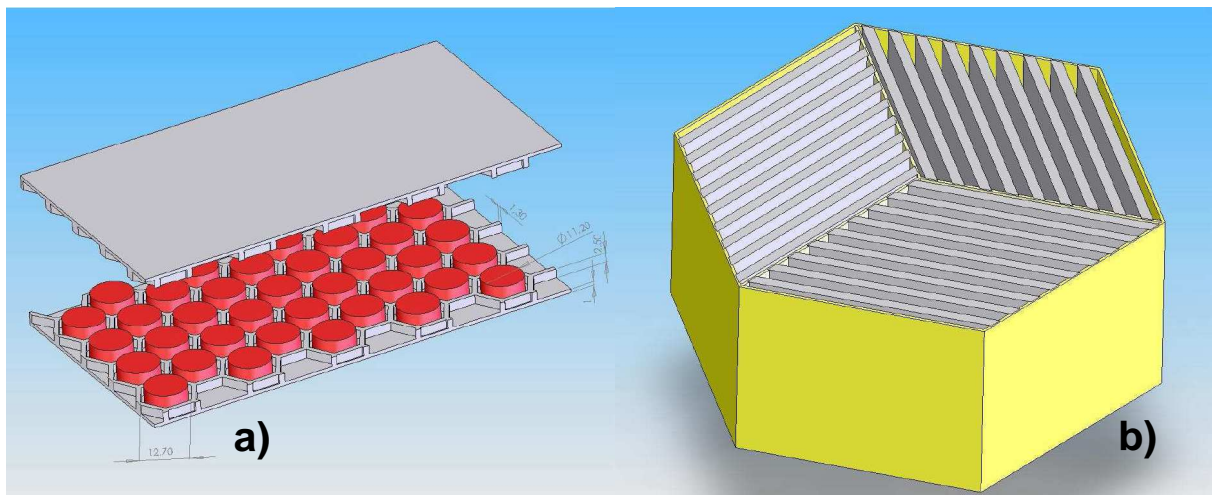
GFR: plate fuel element (a) and sub-assembly with fuel plates (b) [17]
